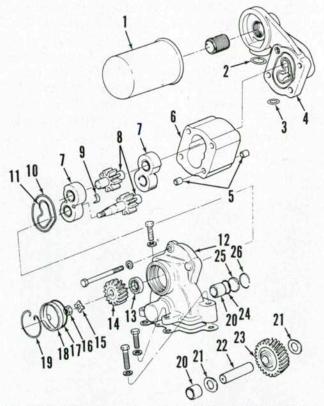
Exploded view of auxiliary hydraulic pump assembly.
